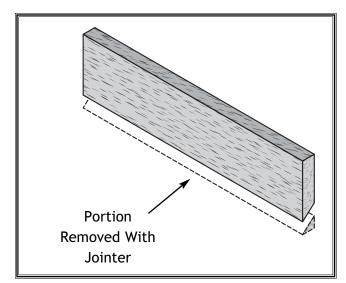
Bevel cutting produces an angled edge on the workpiece.
